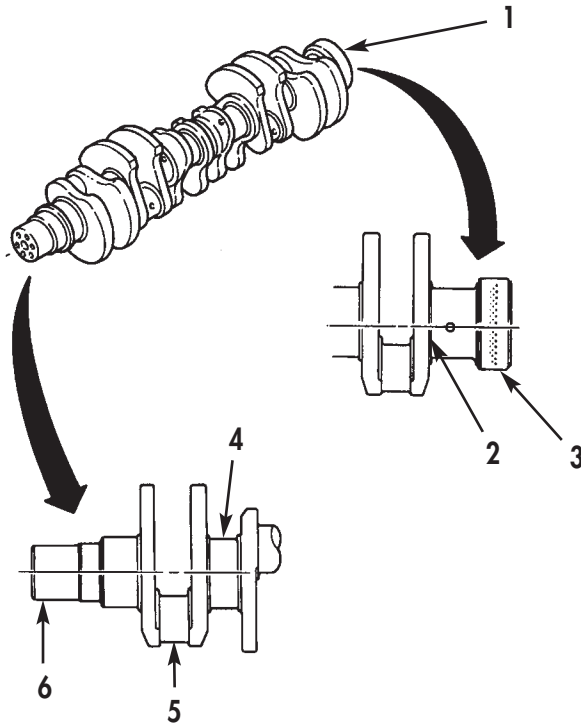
Crankshaft Cleaning and Inspection.
